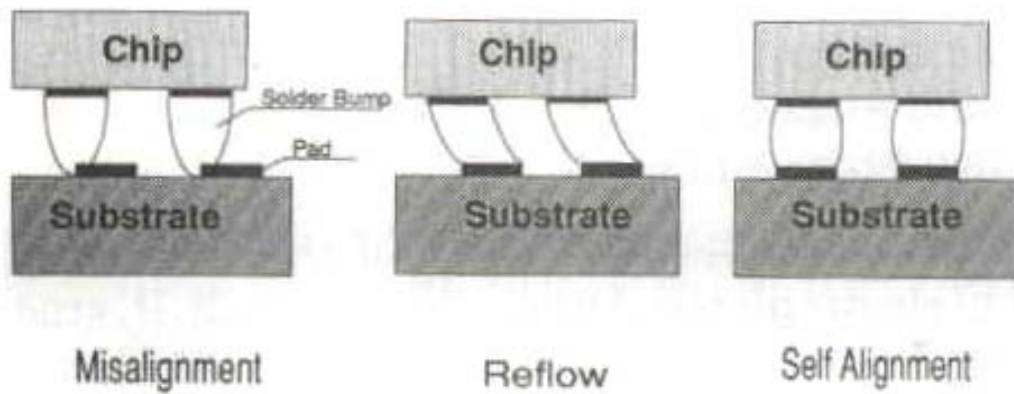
Self-alignment of FC-BGA assembly [18]
